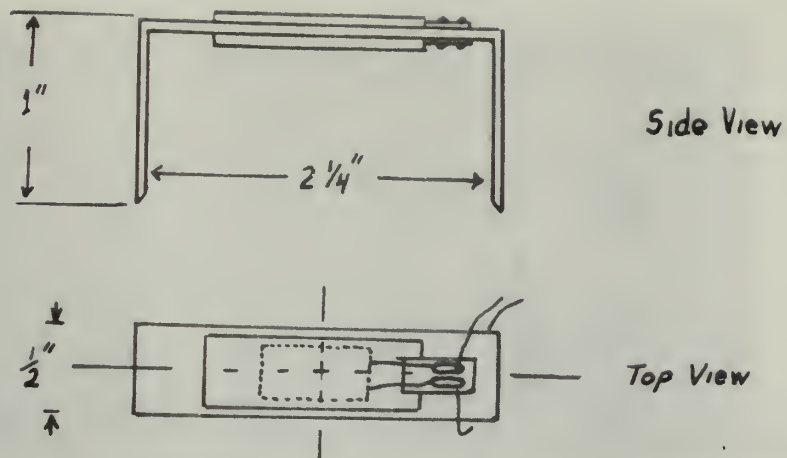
CLIP GAUGE EXTENSOMETER (DIMENSIONS)
